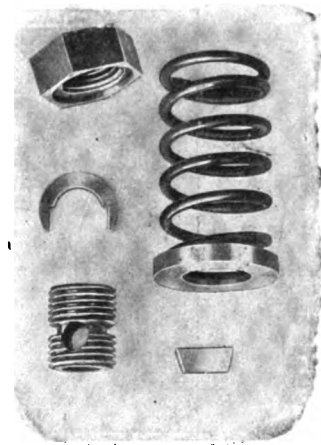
The Component Parts of the Bramley Valve Attachment.
